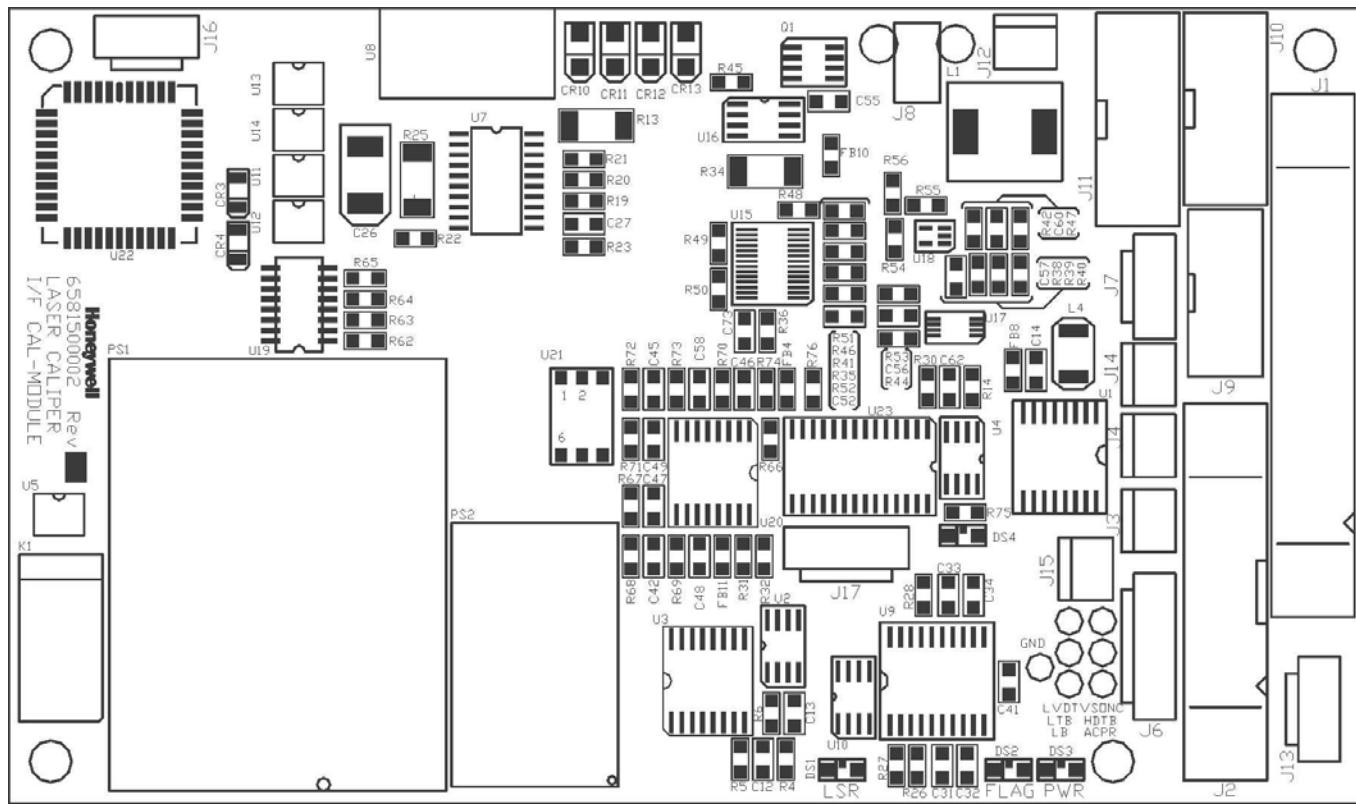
Layout of calibration-module PCBA (6581500002). The test points and LEDs are in the lower right hand quarter
